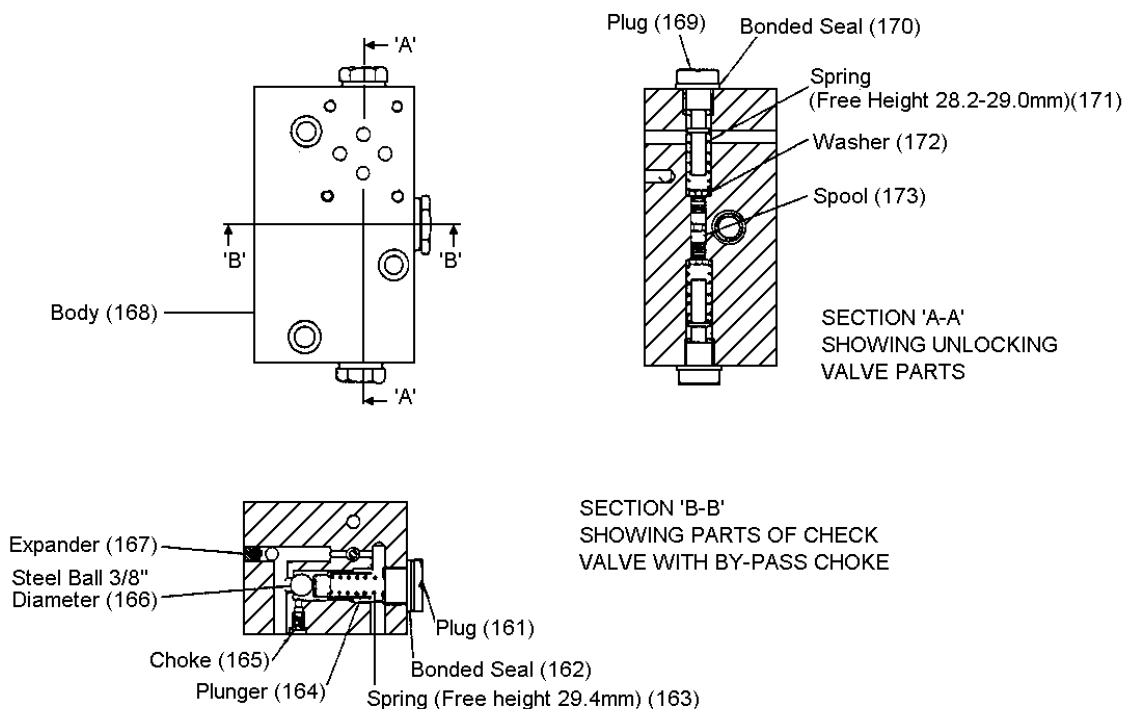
Hydraulic Parking Brake Control Unit - Multi Valve
